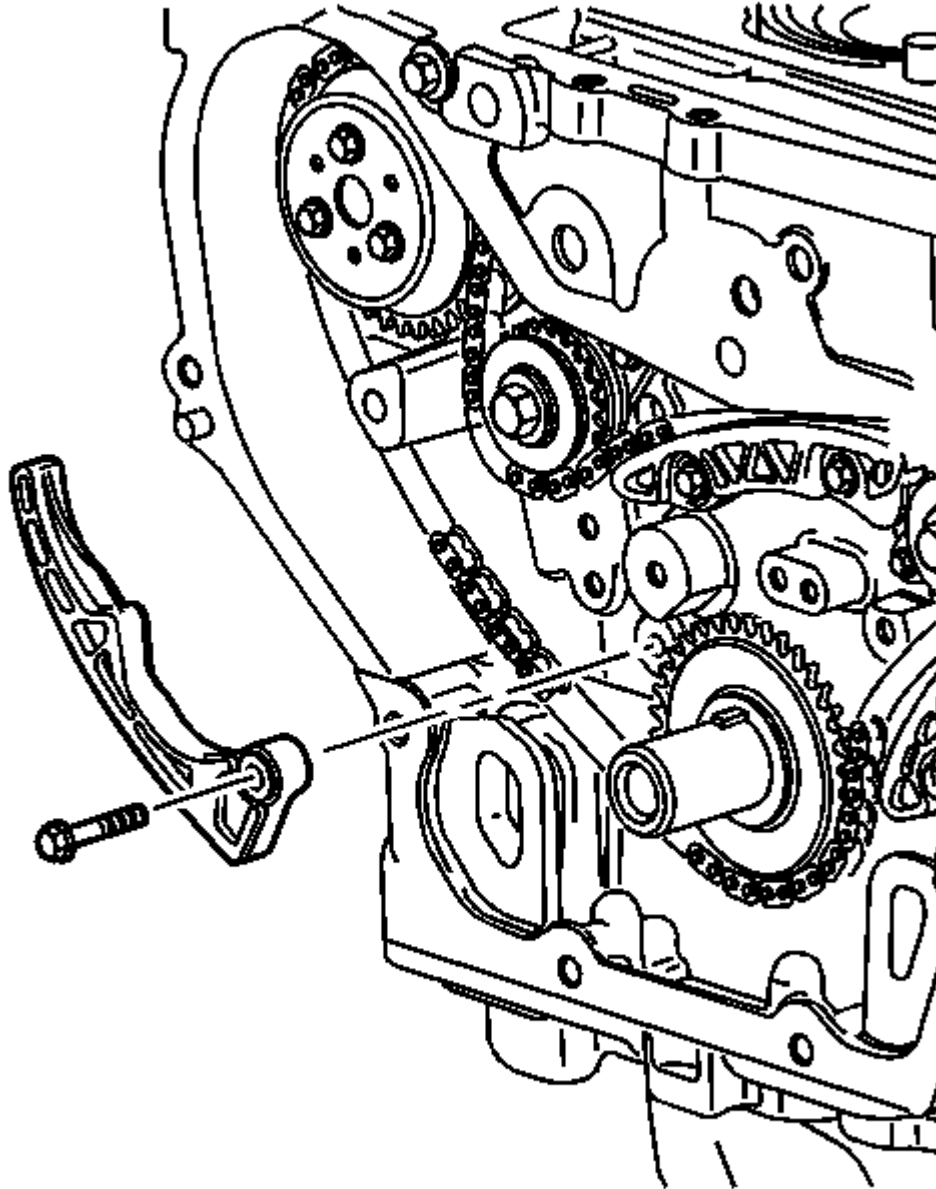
View Of Adjustable Balance Shaft Chain Guide
